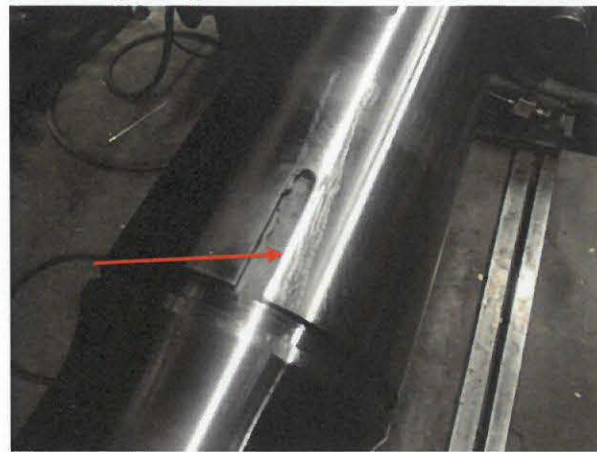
Shaft Gall At 4<sup>th</sup> Stage Impeller
